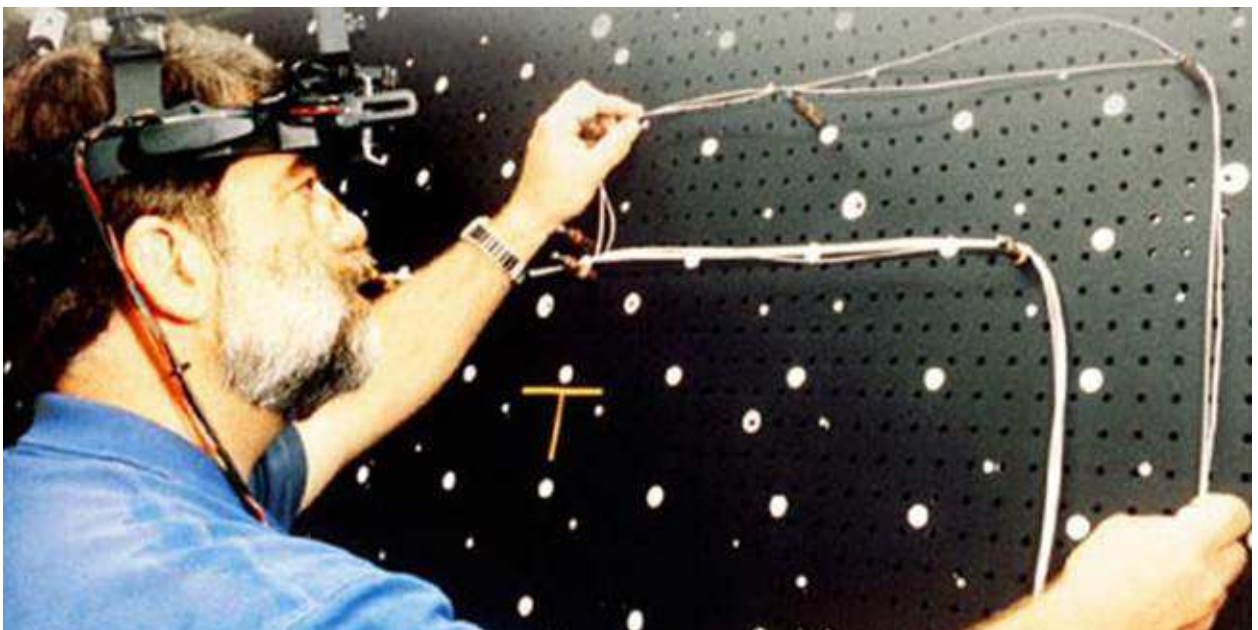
Boeing's prototype system displaying wire bundle assembly.
